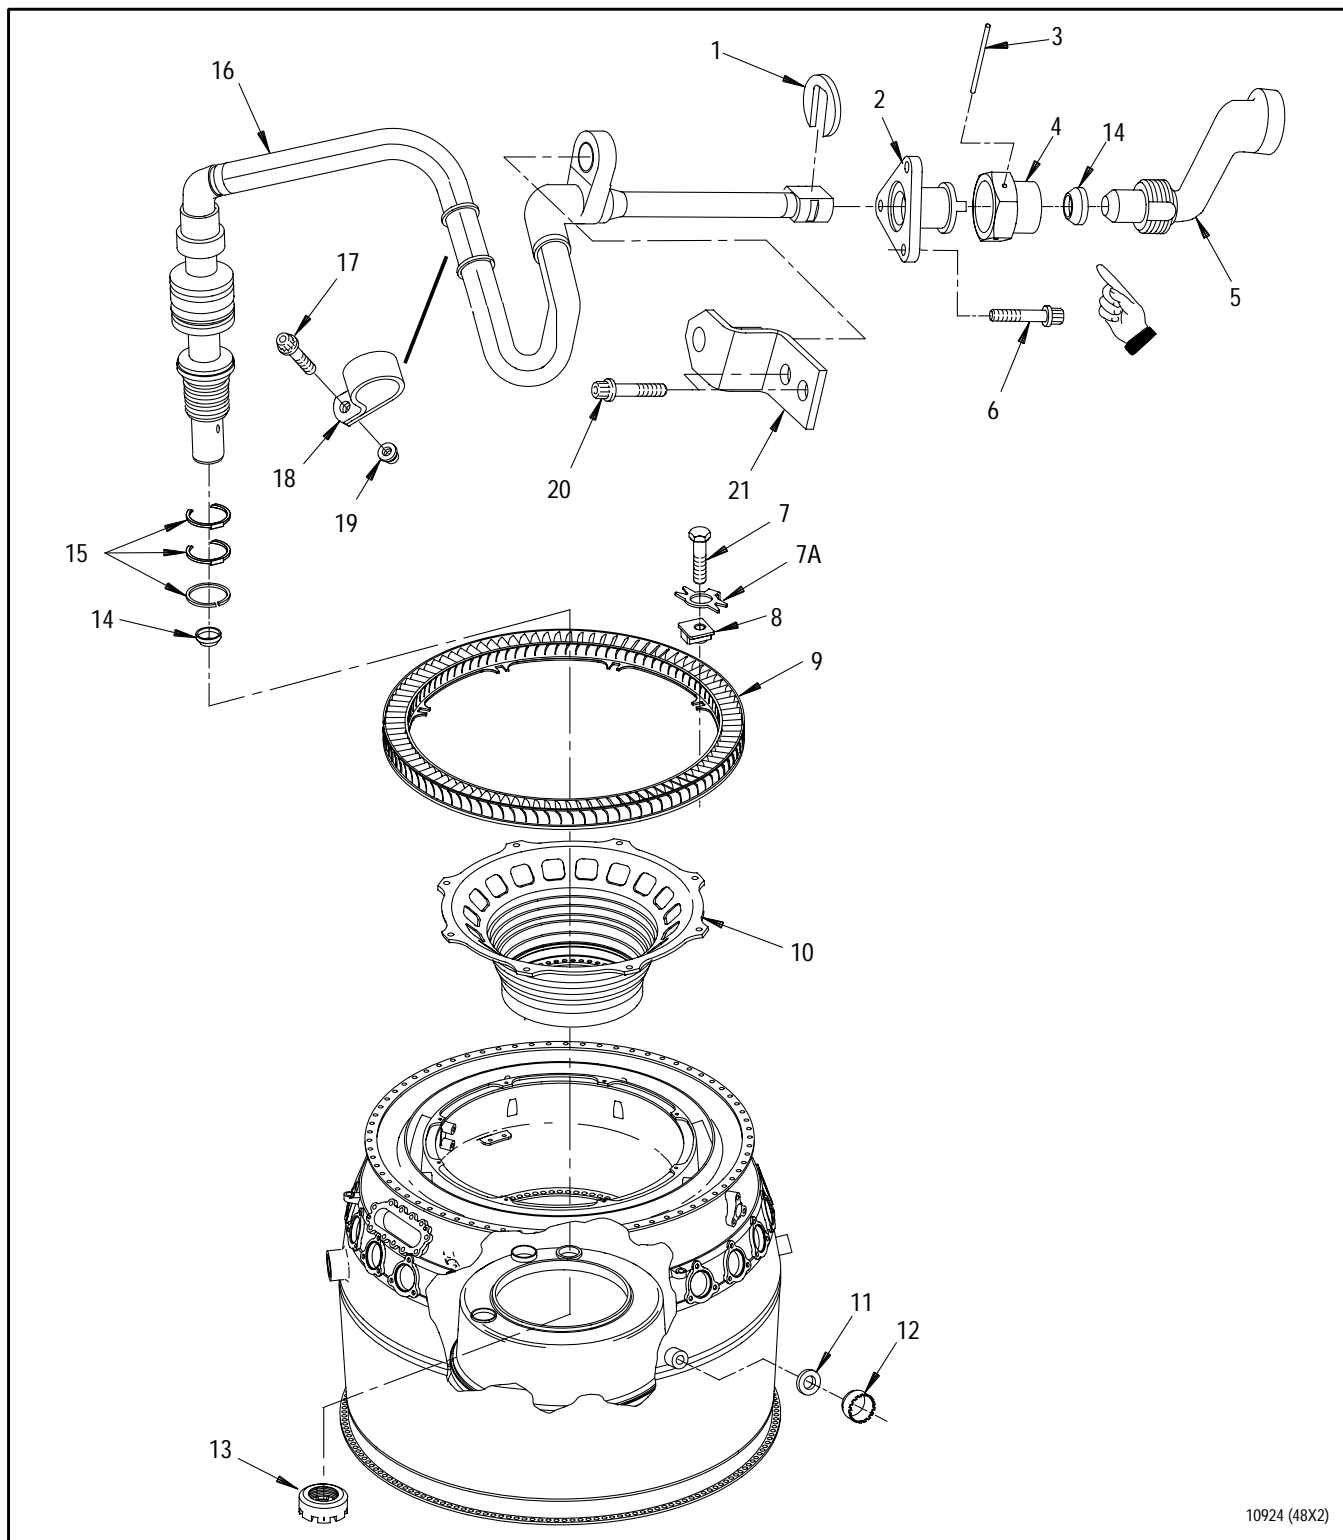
No. 4 Bearing Internal Pressure Tube, Compressor Exit Stator and No. 4 Bearing Internal Pressure Manifold - Removal
